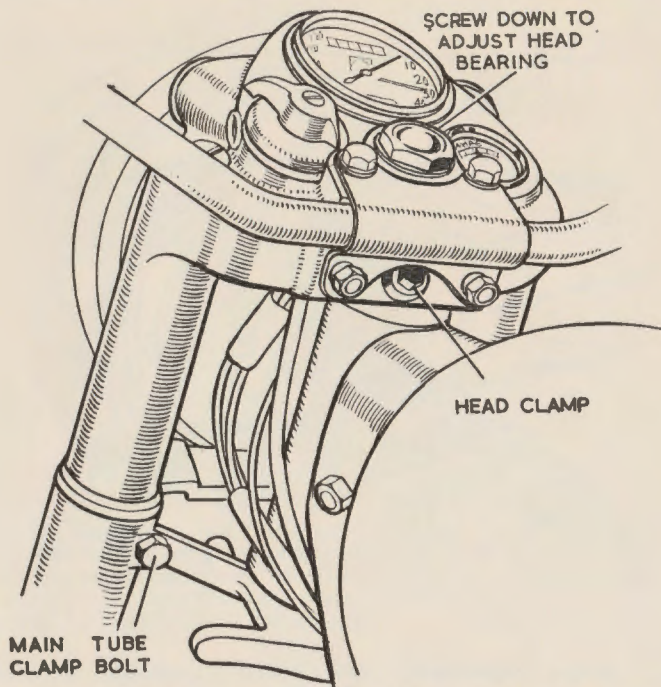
Showing the positions of the clamp bolts securing the steering stem and fork tubes.
